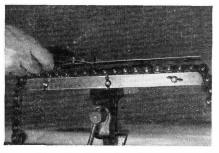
Checking the clearance of the depth gages—one of the most important steps in sharpening a saw chain.
